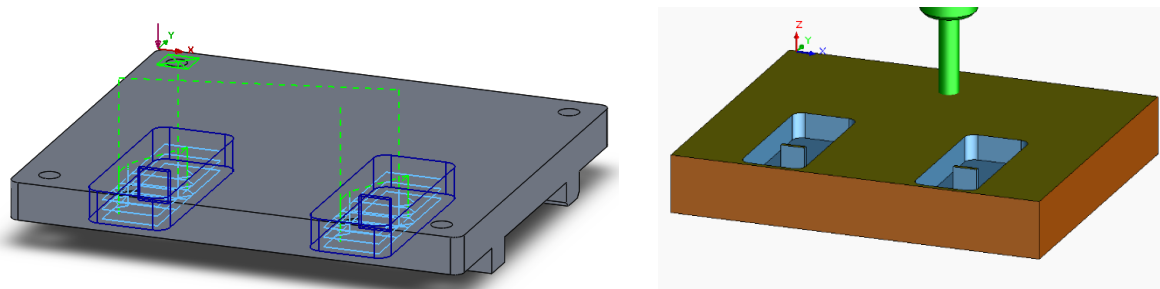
Machining clip body slots (a) Tool path (b) Machined result
